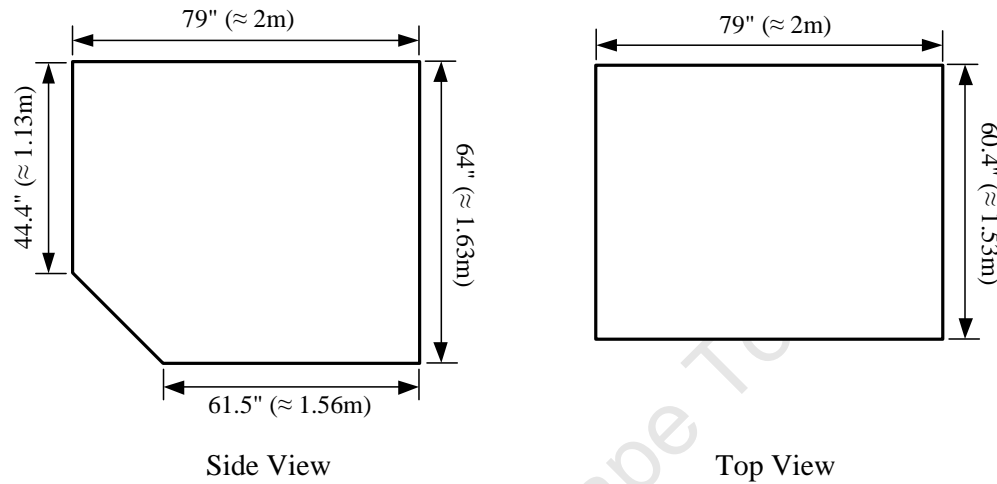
Dimensions of LD-3 Luggage Container [10]
